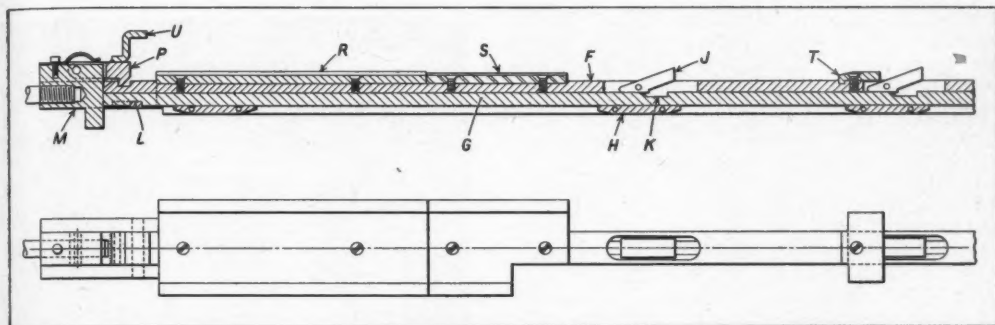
Part plan and sectional views of the shuttle bar employed for feeding and transferring workpieces from one station to another of the multi-stage tool for the production of printing plates
